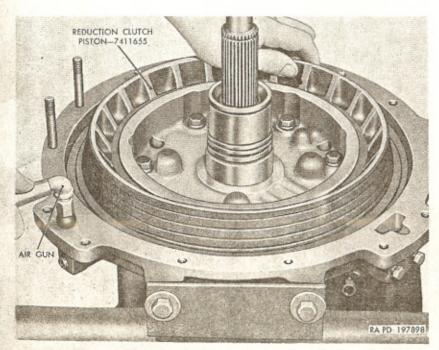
Removing reduction clutch piston using air gun—B7950562 (303M).
